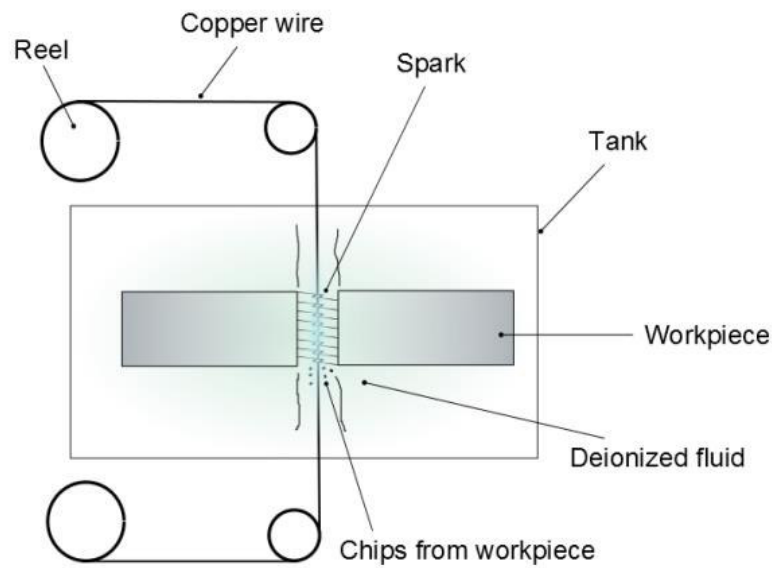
Illustration of traveling wire Electrical Discharge Machining. This draw is inspired by [18].
